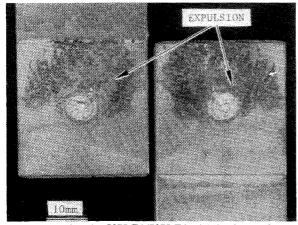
Expulsion in 7075-T6/7075-T6 high-load transfer weld-bonded fatigue specimen at R=0.1.
